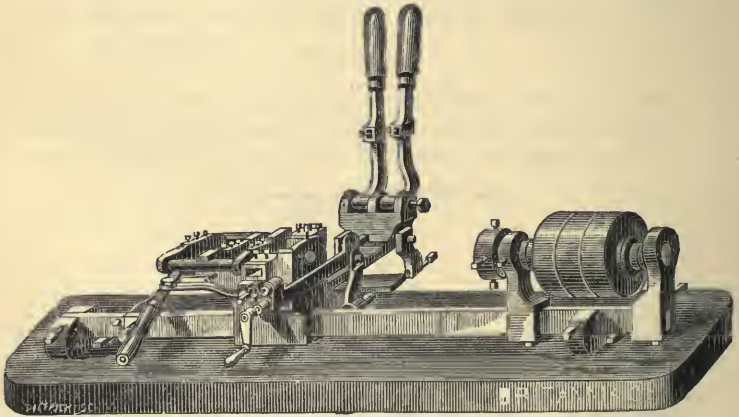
FRENCH SCREW-MAKING MACHINE.
